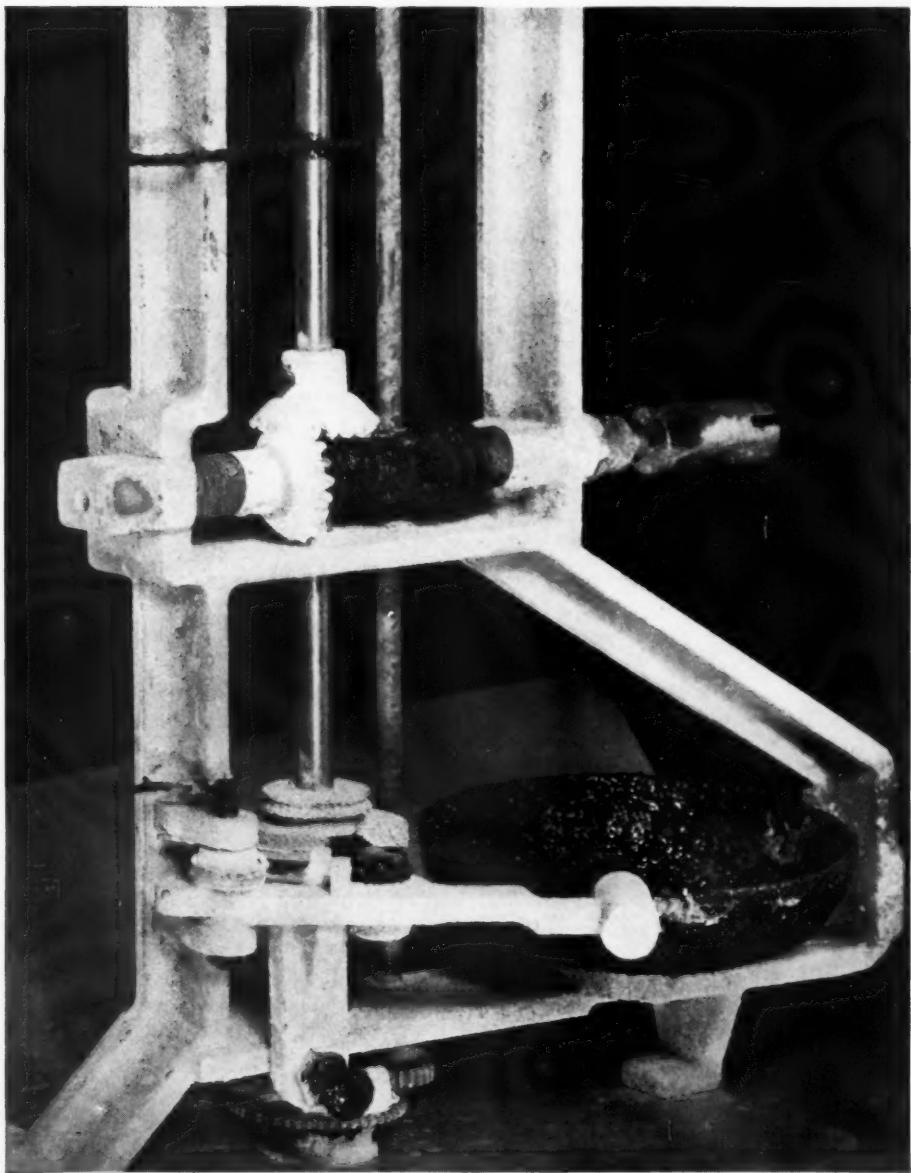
A Mechanical Assembly received in the Far East rusted beyond use due to lack of rust protector when packaged.
